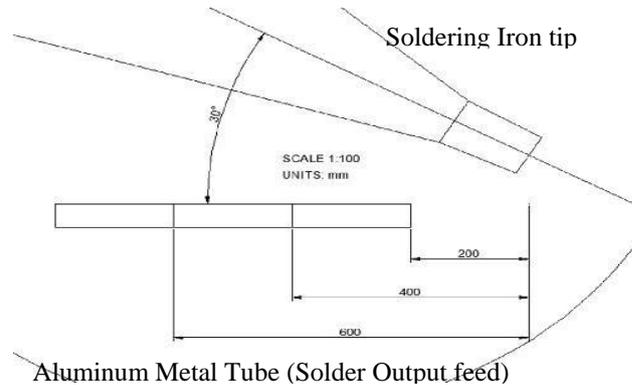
Distance of aluminum metal tube from the tip of soldering iron.
